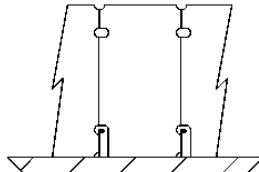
Block assembly methods 5-1c and 5-1d [2], [30]
